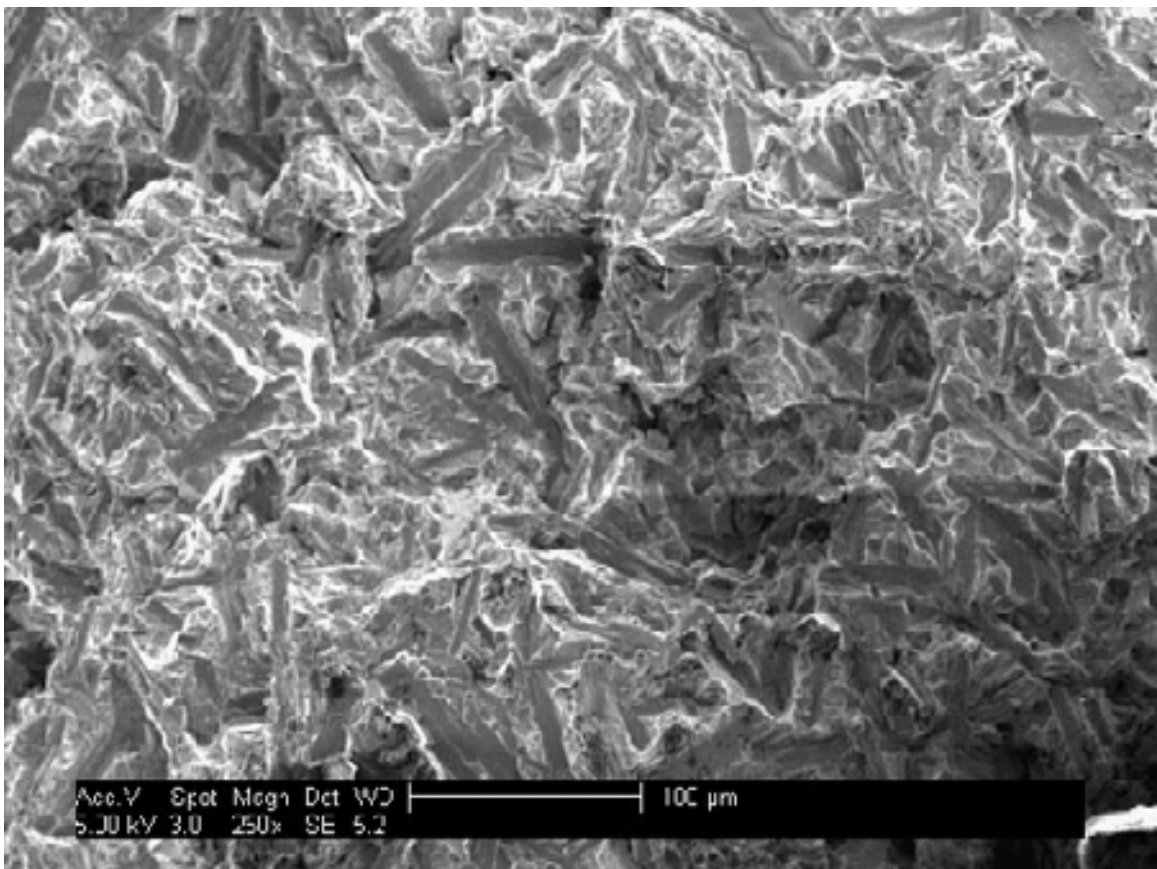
Fracture surface of compacted Ti-6Al-4V-2.9B composite showing a jagged fracture surface, with brittle fracture down the length of the TiB whiskers and ductile fracture of the Ti-6Al-4V matrix.
